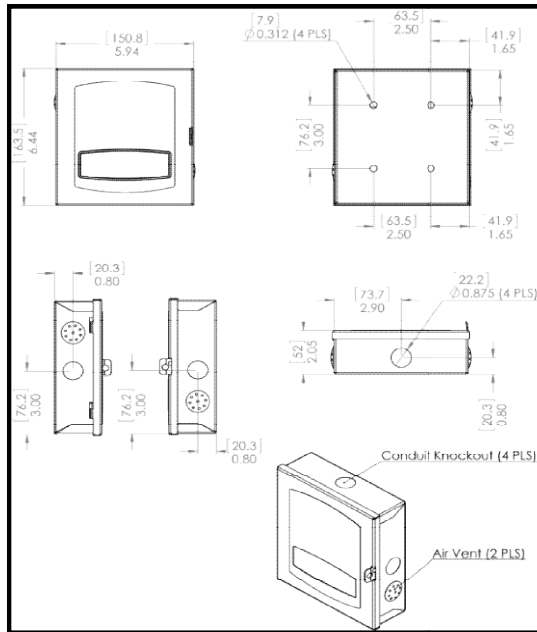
HINGED FRONT PANEL ENCLOSURE DIMENSIONS
